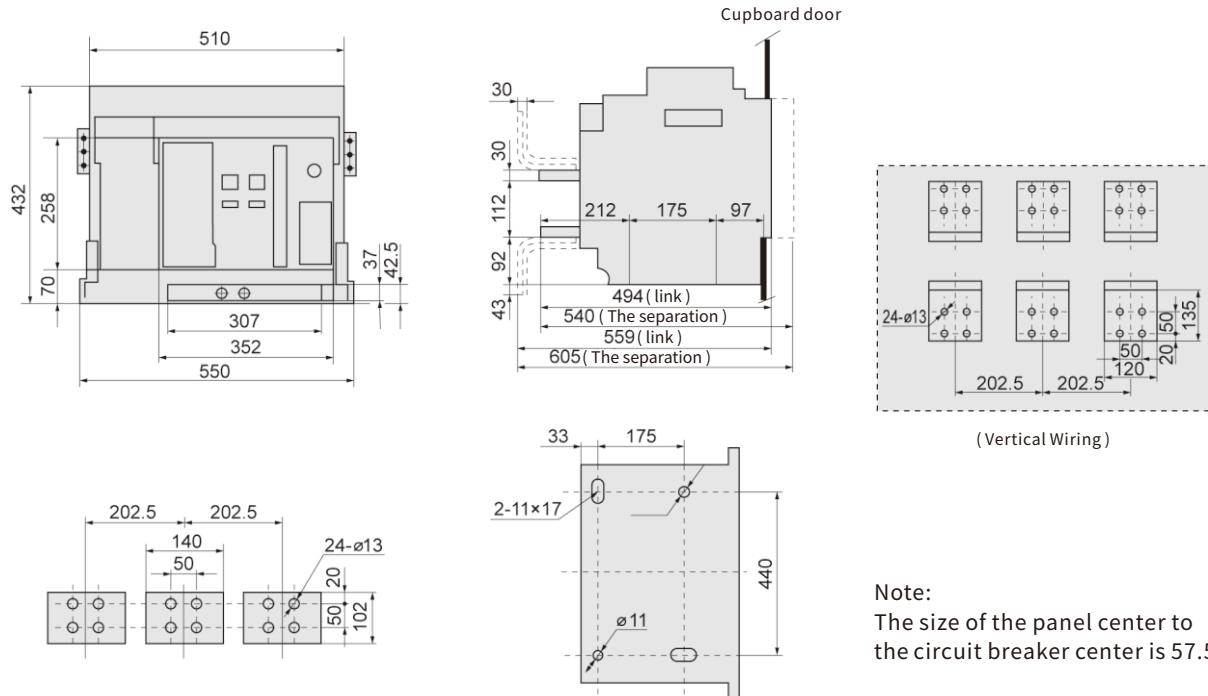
Outline and installation dimensions of drawout type circuit breaker (EKA1-4000)
